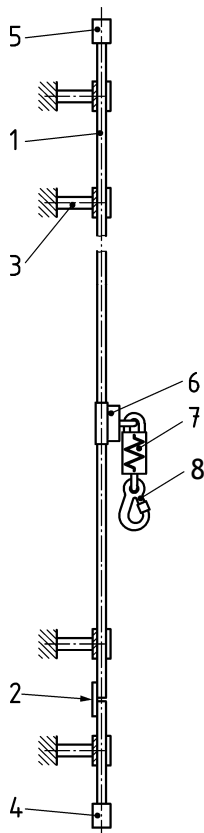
Schematic representation of construction of guided-type fall arrester with rigid anchor line made of rail [6]
